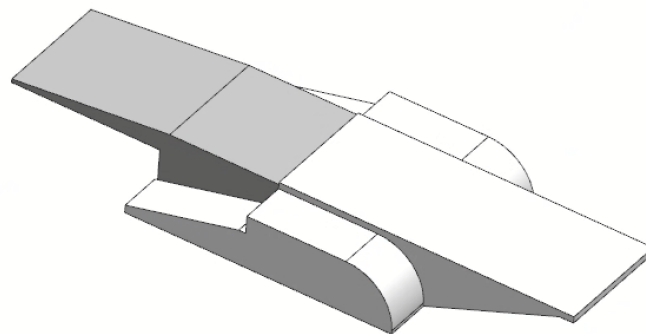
Isometric view of the wedge and the mounting mechanism. A total of 3 wedges have been created for the 3 different plates since their heights differ. See Appendix C for detailed engineering drawings of the 3 wedges and mounting bracket.
